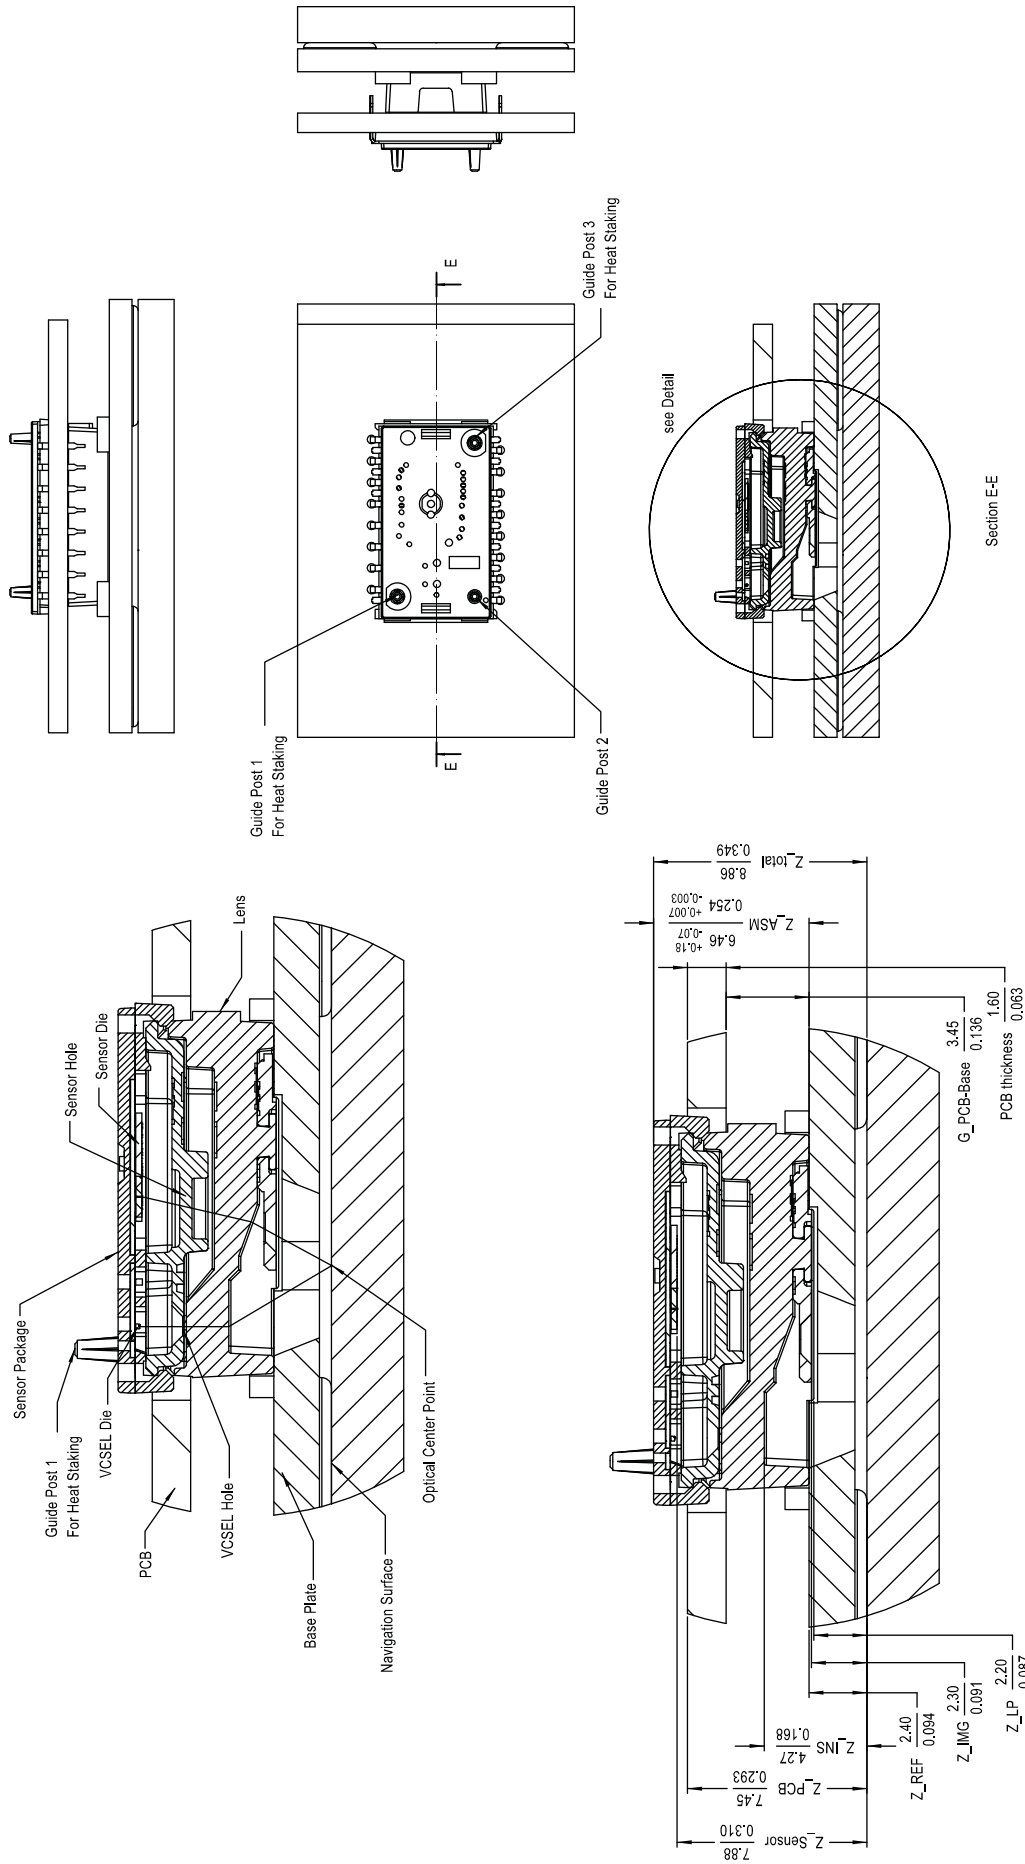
Assembly drawing of sensor and lens coupled with PCB and base plate (Dimensions are for reference only)
